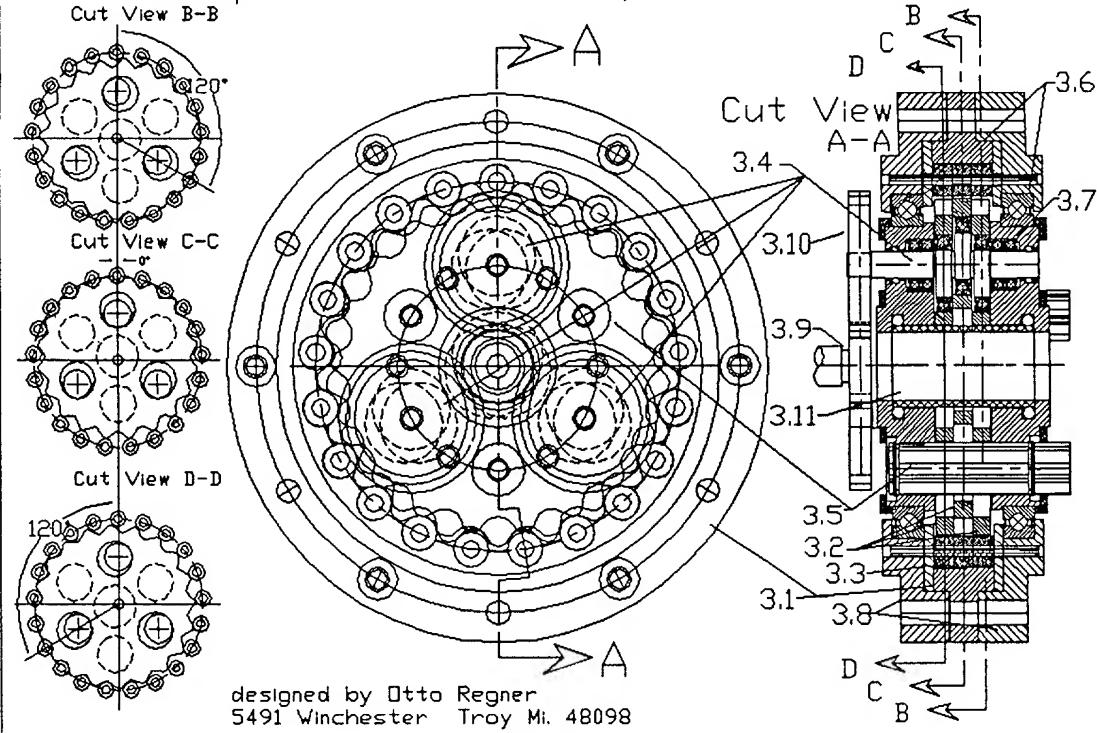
Heavy-Duty Precision Cyclo Gear System with Three Camshafts, Three Torque Rods, Three Disks, Three Planet Gears, One Center or One Outer-Centered Peripheral Sun Gear, and Hollow Center, Hole
